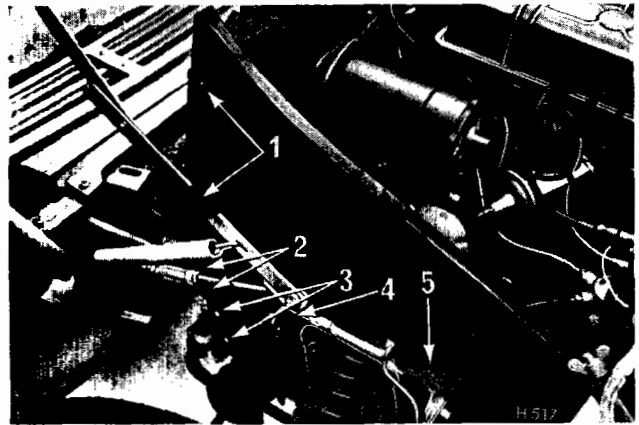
Engine bay valance attachment (1200, 12/50 and 13/60)
